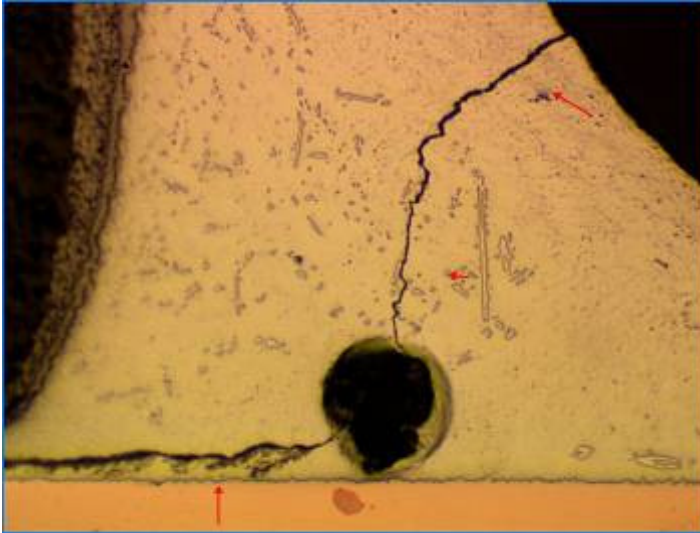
cross section, SN67, U52, right lead solder crack, 200xa
